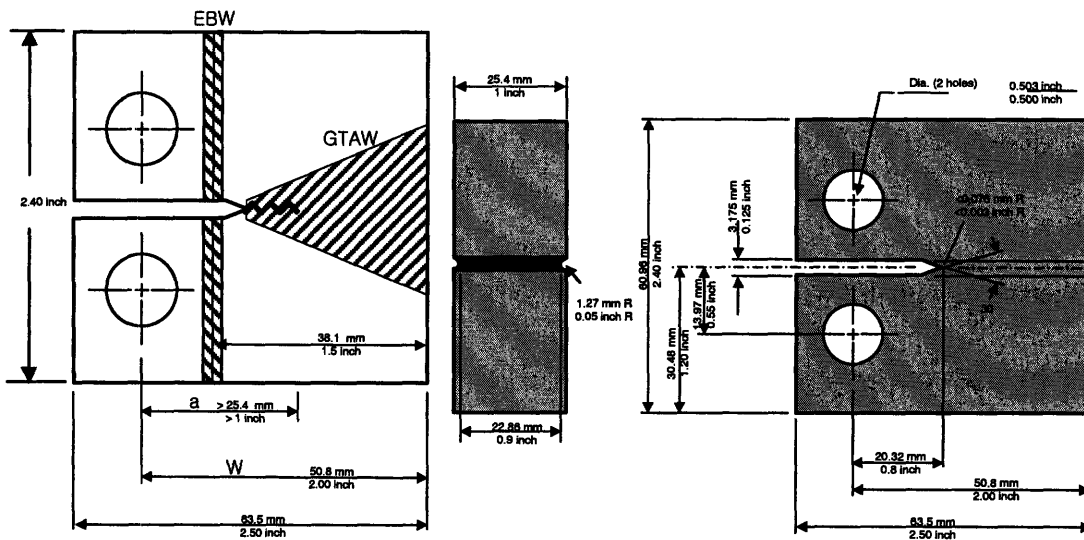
CT Specimen Drawing Showing Dimensions and Locations of EB and GTA Welds
